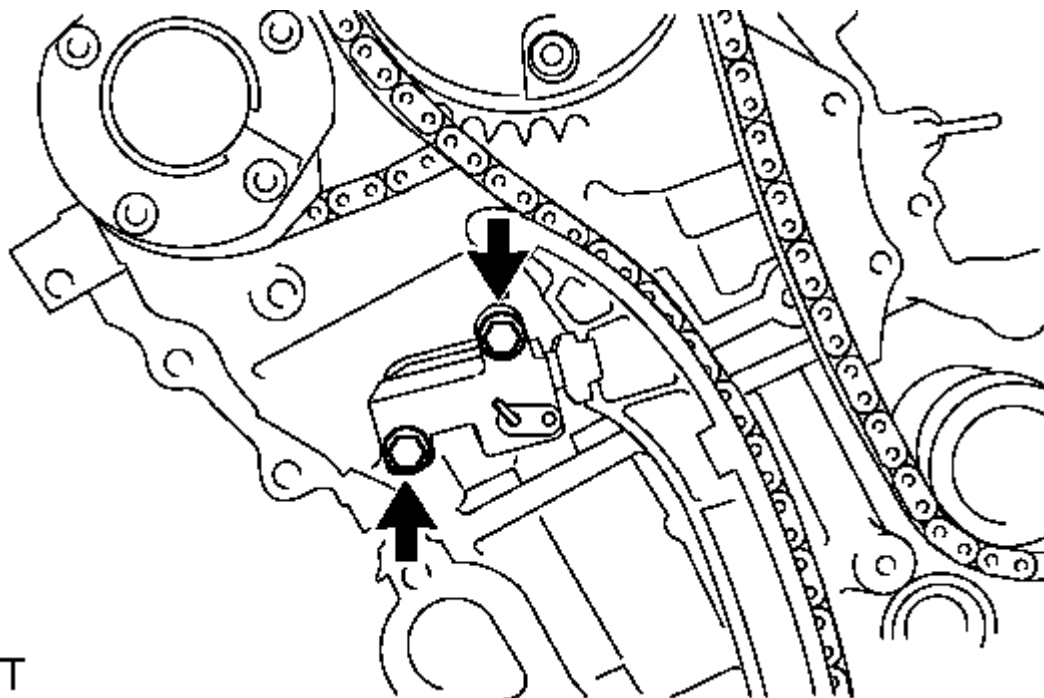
Identifying No. 1 Chain Tensioner Assembly & Fasteners
